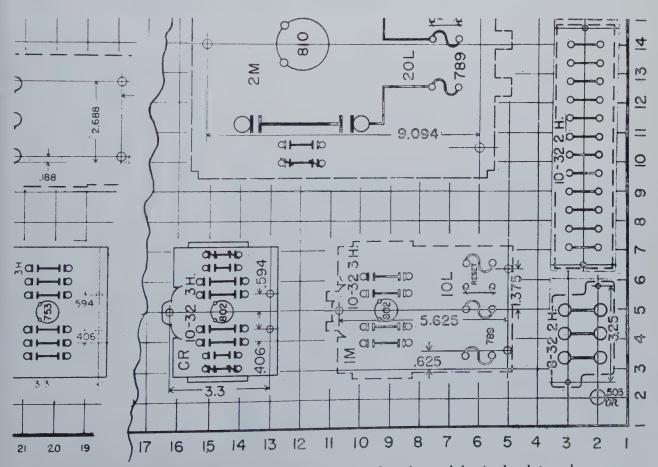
All dimensions for panel fabrication are produced on the panel drawing by photography.
